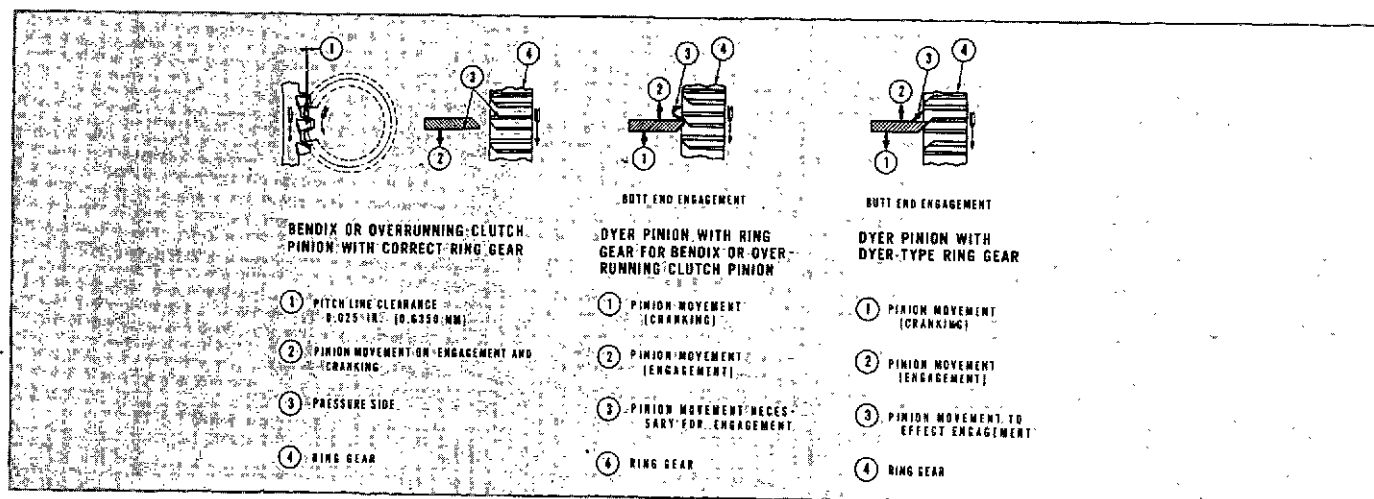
, V41301. Action of Dyer drive-type pinion in engaging with flywheel teeth of different chamfers
